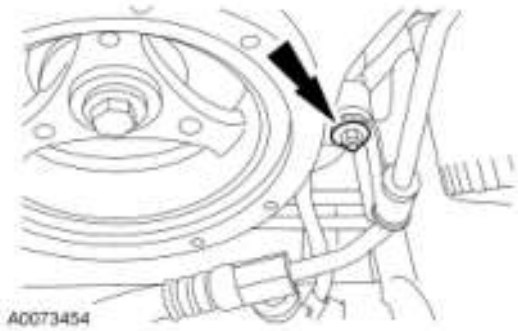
Locating Power Steering Pressure Hose Support Bracket Nut
